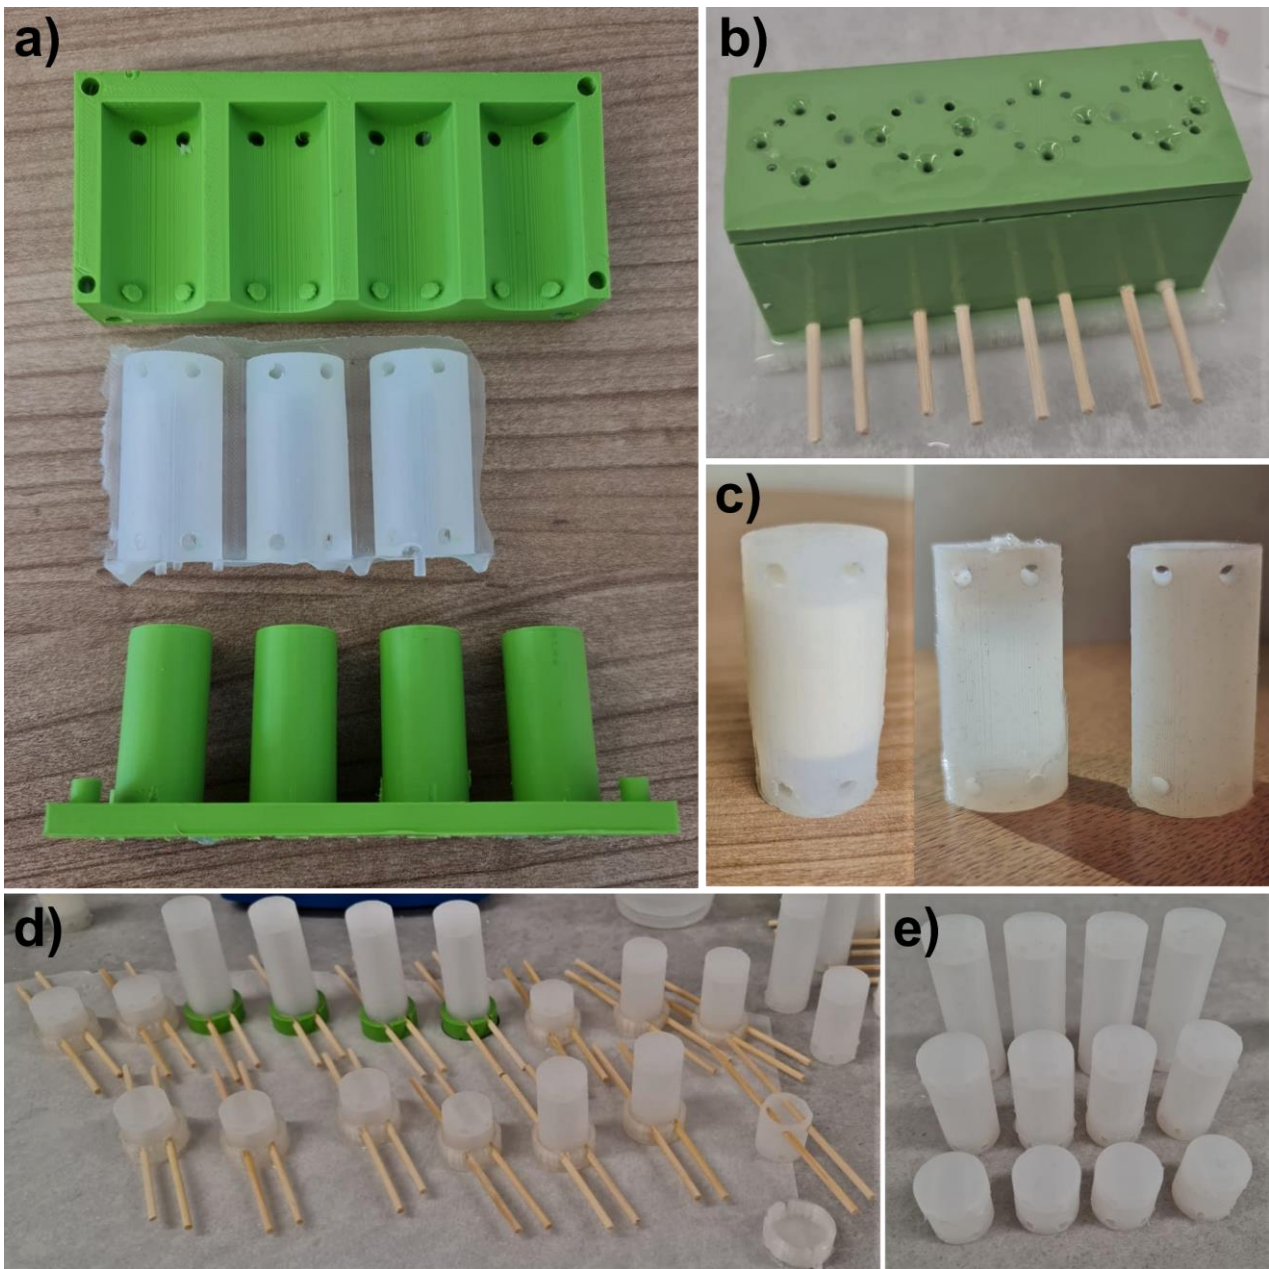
a) Custom 3d printed mould (open) b) Closed mould c) Joints left-right: STF, Water, Silicone d) End-capping e) Three joint sizes (60/40/20mm)
